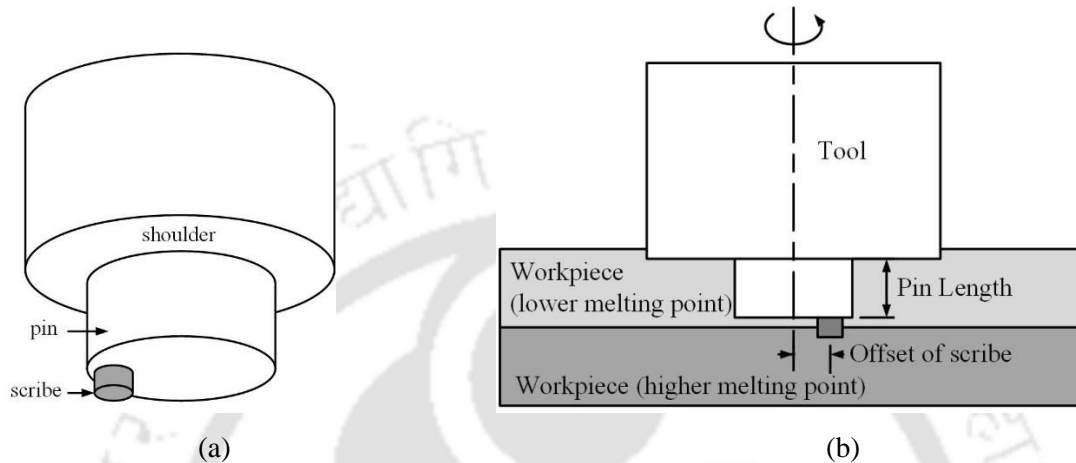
FSS process: (a) tool with scribe cutter (b) schematic of the process
